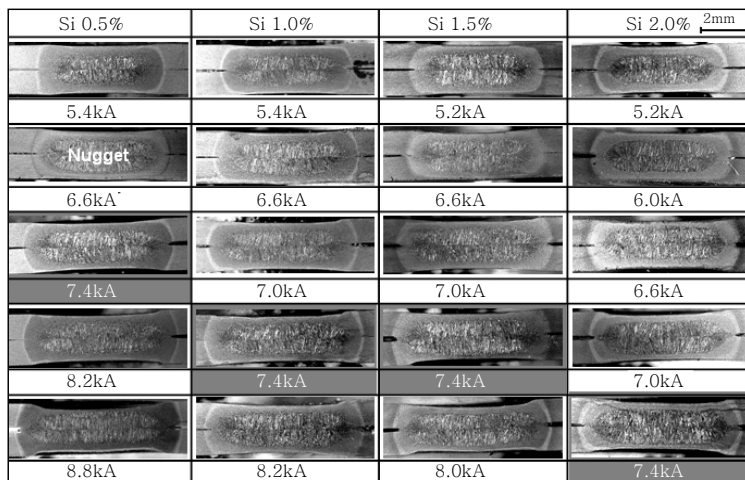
Cross-sections of spot welds with various Si content and welding current
